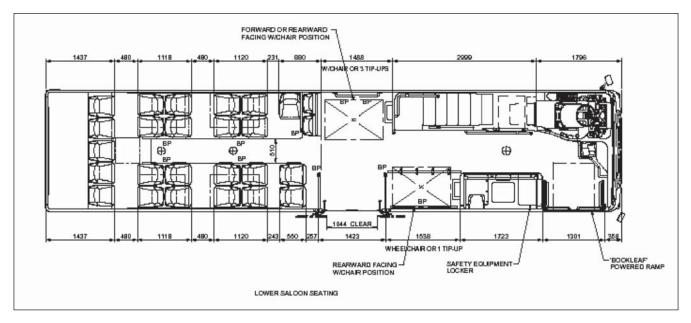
Floor plan of lower deck of Victoria's double-deck bus. (Source: Alexander Dennis.)
